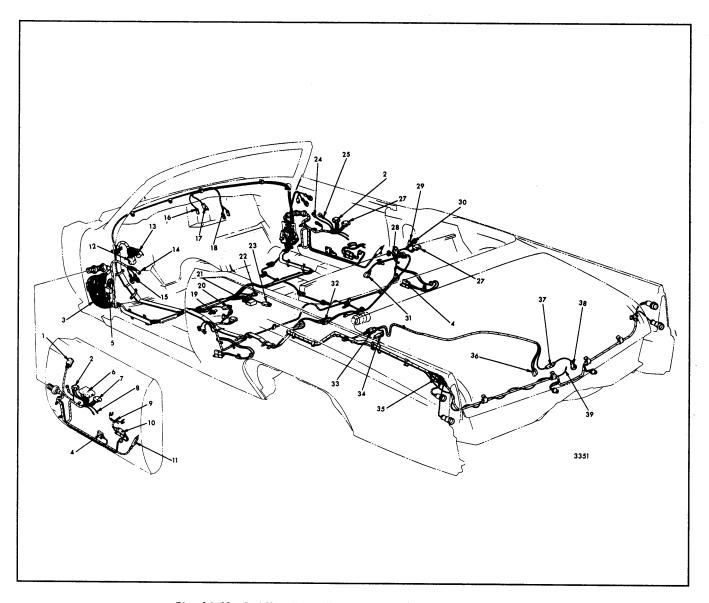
Cadillac "C-67" Styles - Body Wire Routing (Typical)
